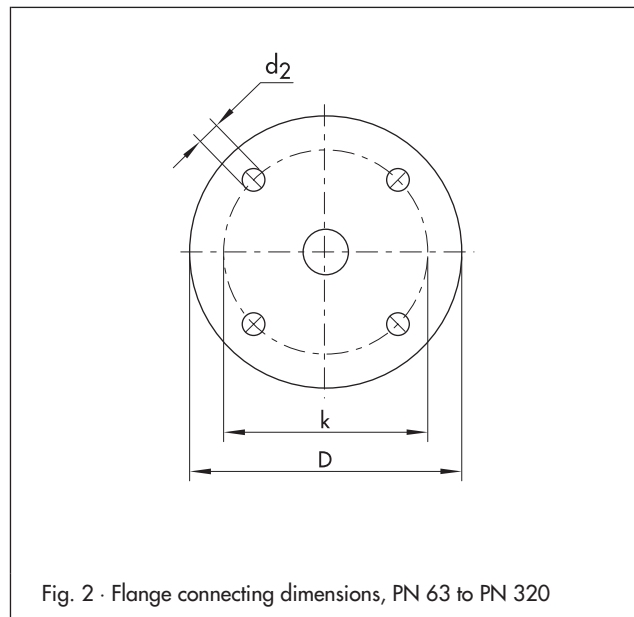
· Flange connecting dimensions, PN 63 to PN 320
